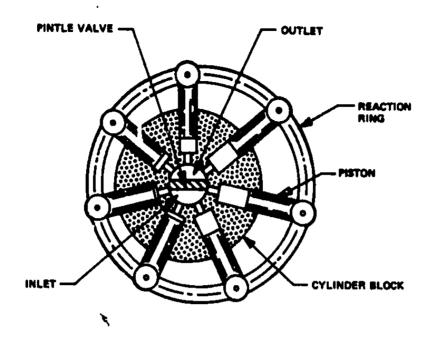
Pintle-Valve Type Radial-Piston Pump
